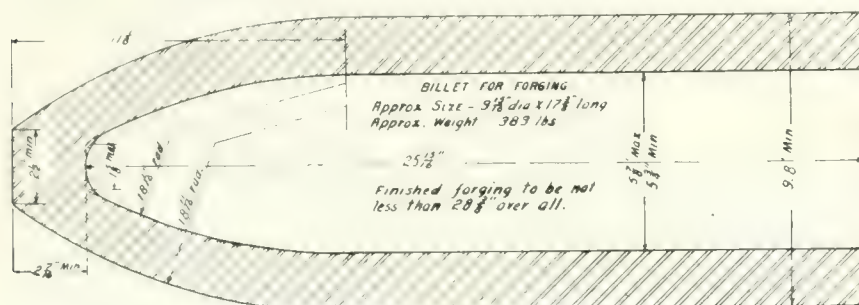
FORGING SIZES FOR 9.2 IN. HOWITZER SHELL.
